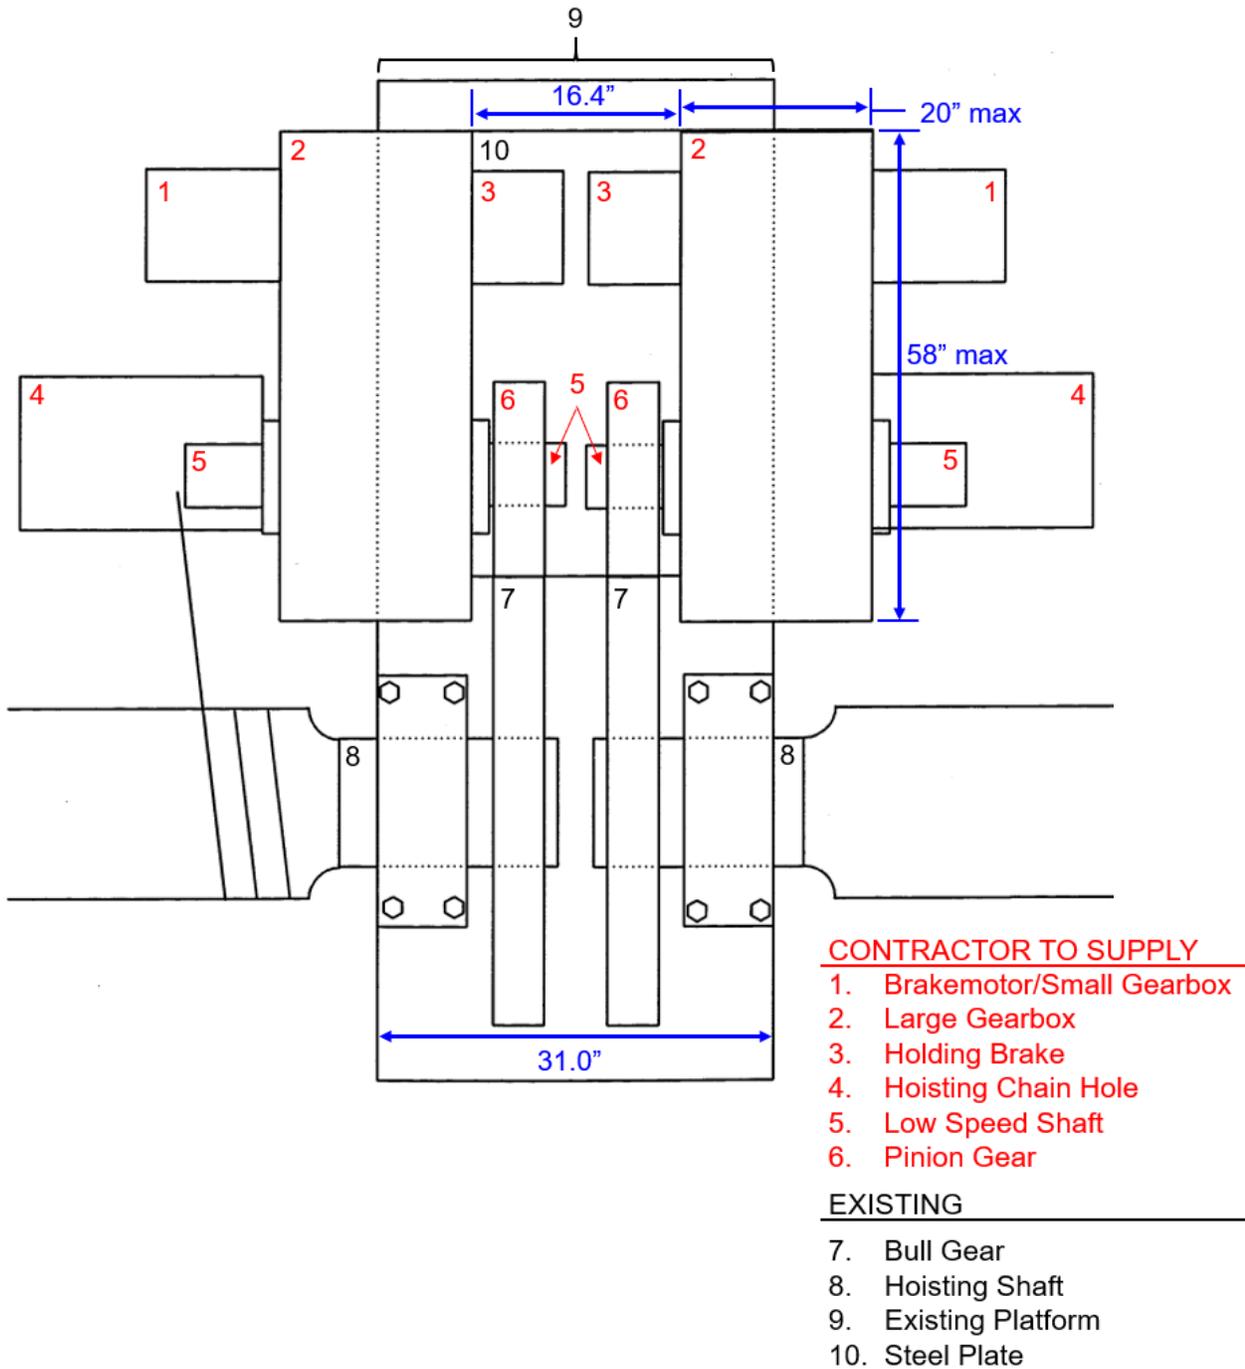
Layout plan view of spillway gate hoisting equipment as situated on-site.
